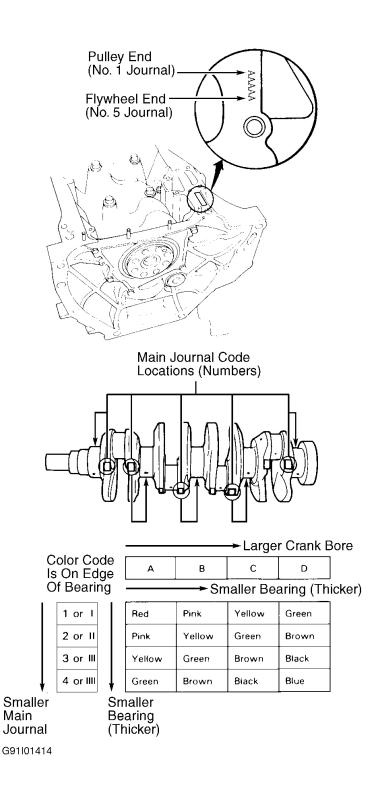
Crankshaft Main Journal & Bearing Identification Codes Courtesy of AMERICAN HONDA MOTOR CO., INC.
